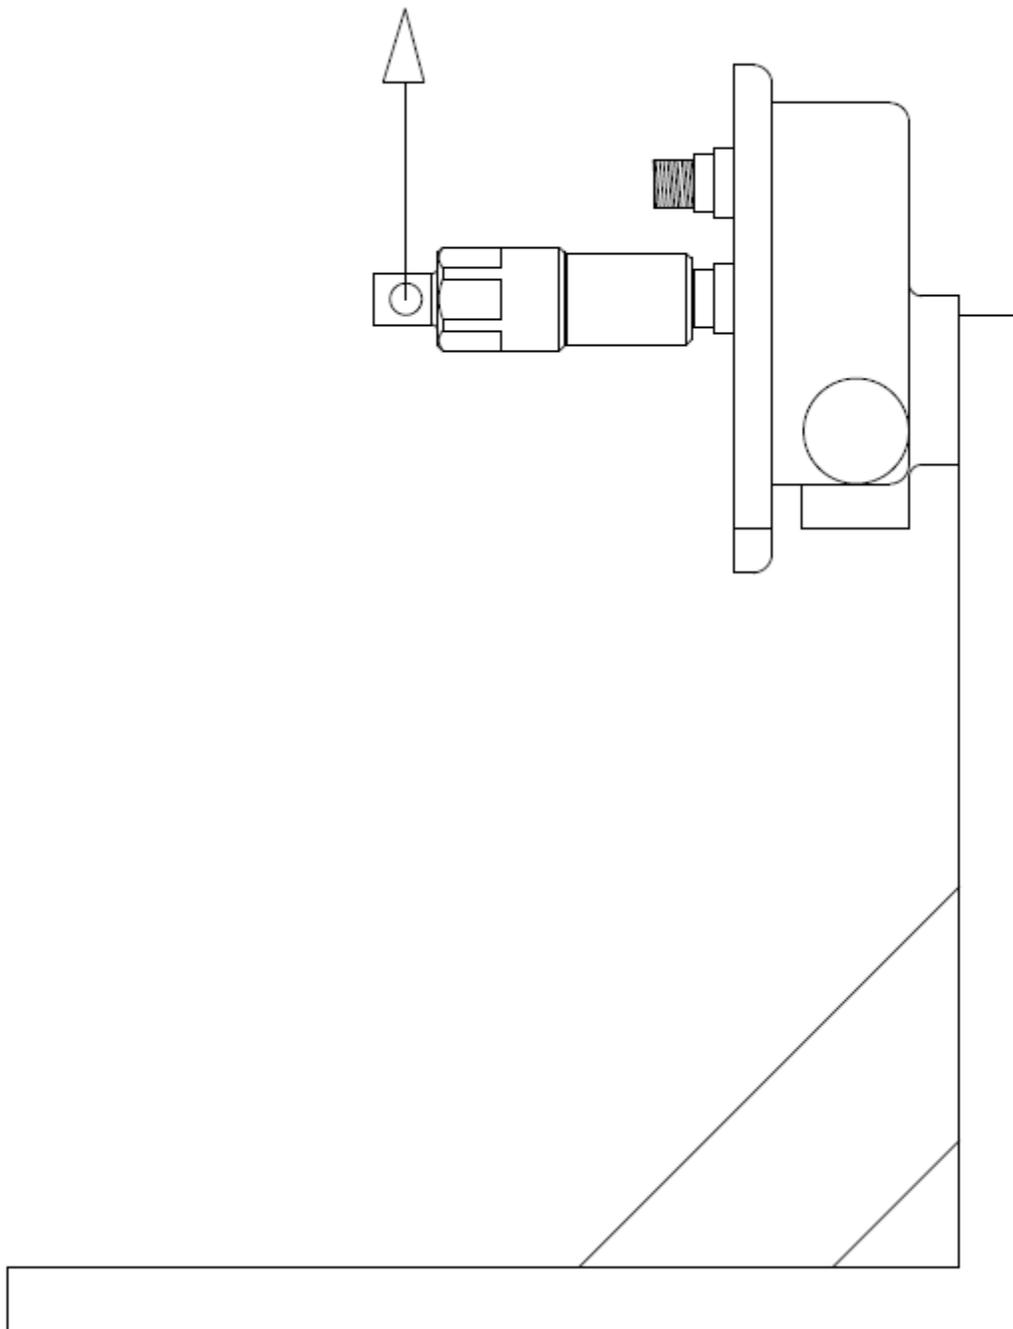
Possible Mounting Stand With Device And Test Fixture Attached. Test Fixture To Be Pulled In The Direction Indicated By The Arrow.
